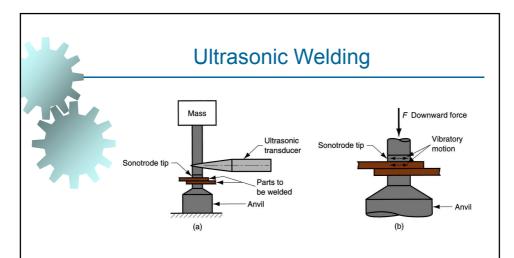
Ultrasonic welding (USW): (a) general setup for a lap joint; and (b) close-up of weld area.
